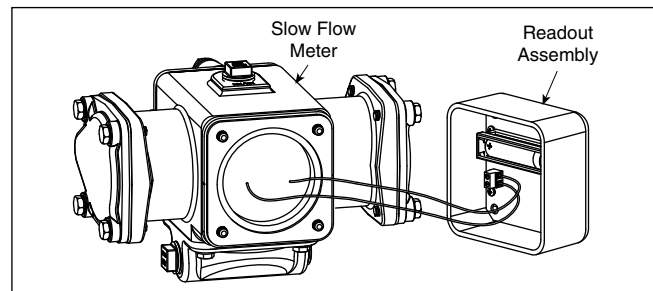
Mounting the Intrinsically Safe Readout to the Meter Without Terminal (Direct Mount)
